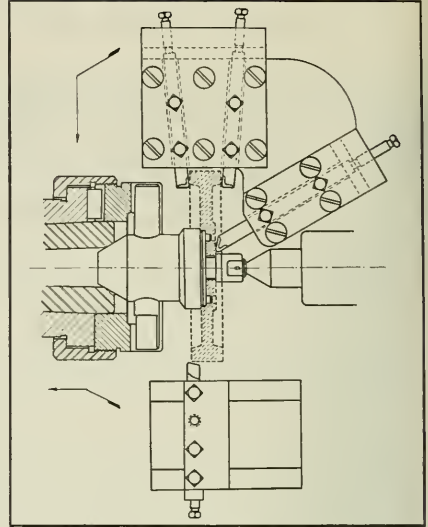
Facing Hub and Rim Sides of Camshaft Gear on a Fay Automatic
